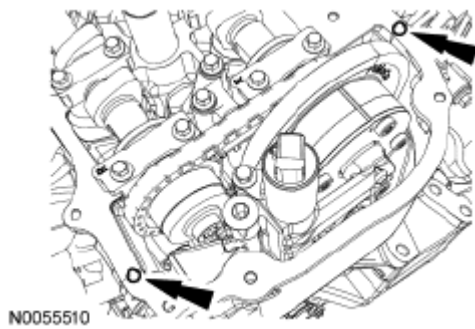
Locating Engine Front Cover-To-RH Cylinder Head Joints
